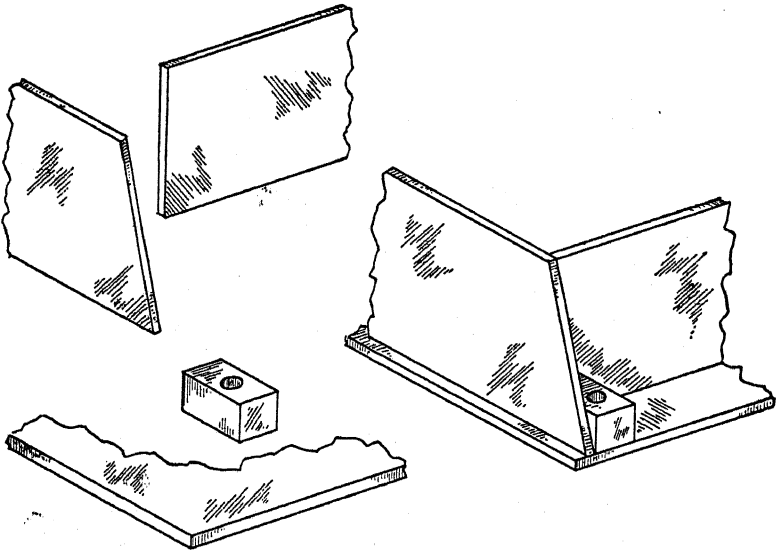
A base corner with a boss for holding-down bolt. An extremely inexpensive design. Easily assembled, with no scrap material.
